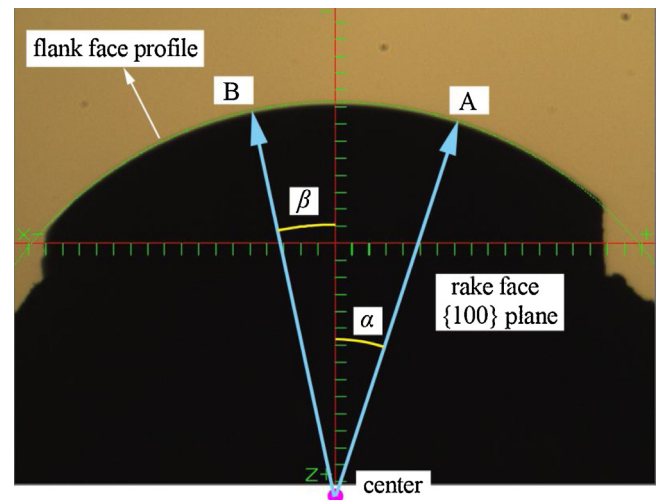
The CCD image of diamond tool sample after preliminary lapping finished.
